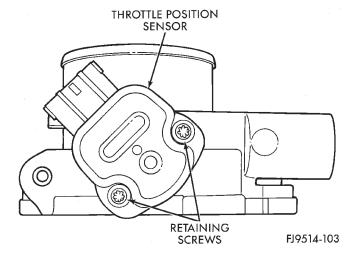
Throttle Position Sensor—2.5L Engine INSTALLATION
